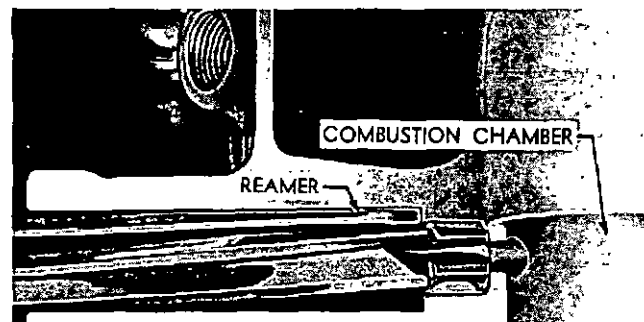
Cleaning Nozzle Recess in Cylinder Head
